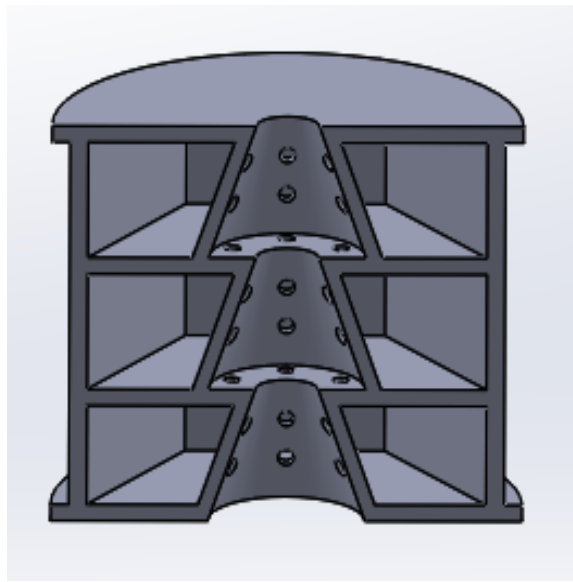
SISO - Enclosed Series of Nozzles with Radial and Axial Perforations - CAD
